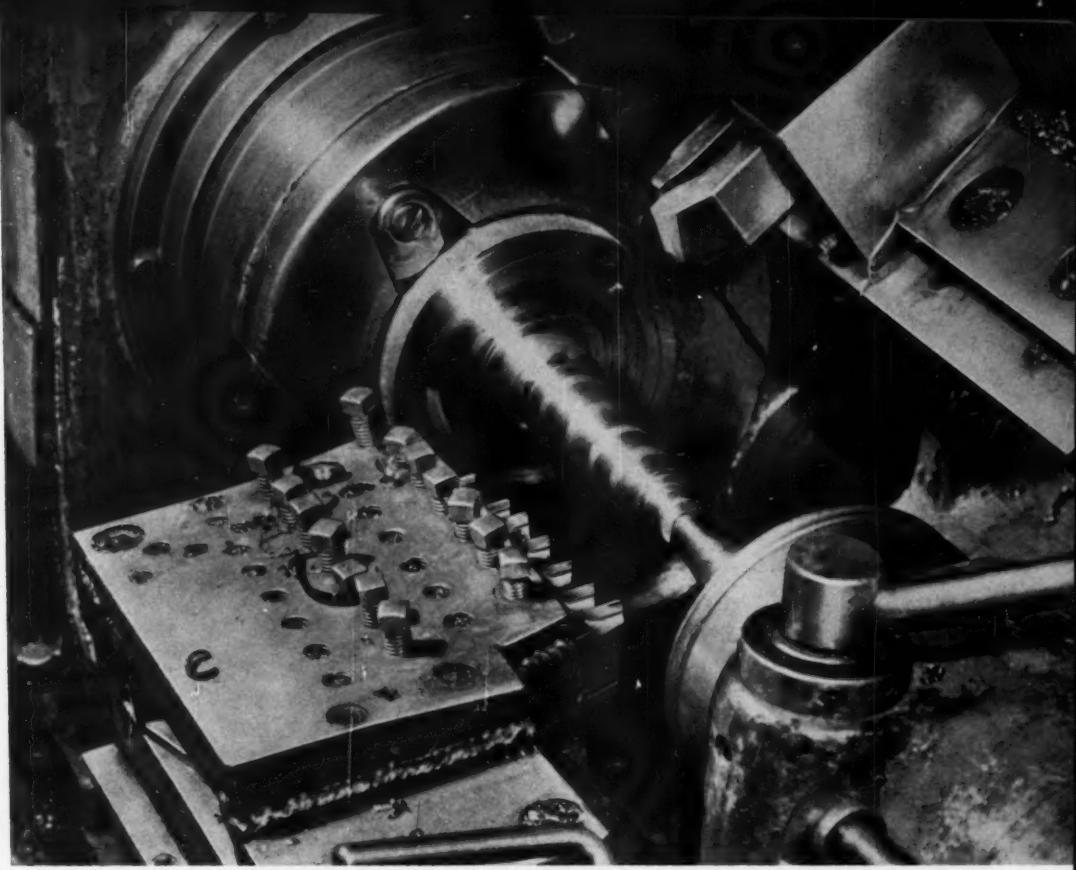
Brazed tools can be ganged close together, as in this setup for turning alloy stem gears in an automatic lathe.
